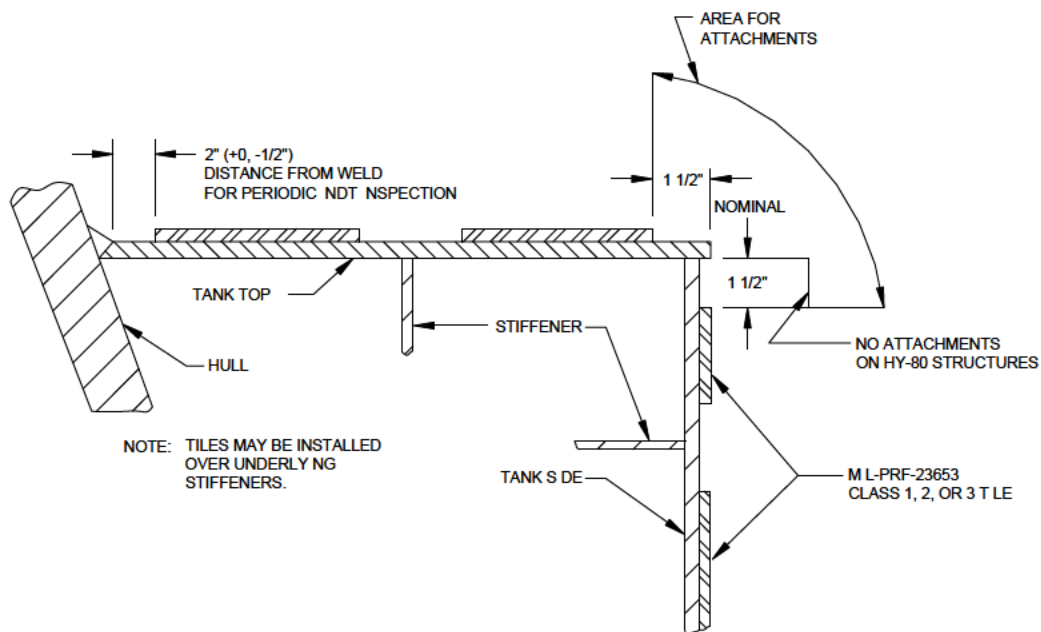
Cross-section view of typical installation of unconstrained MIL-PRF-23653 tiles at tank top and side where plate is not subject to submergence pressure and space is required for attachments (not to scale).
